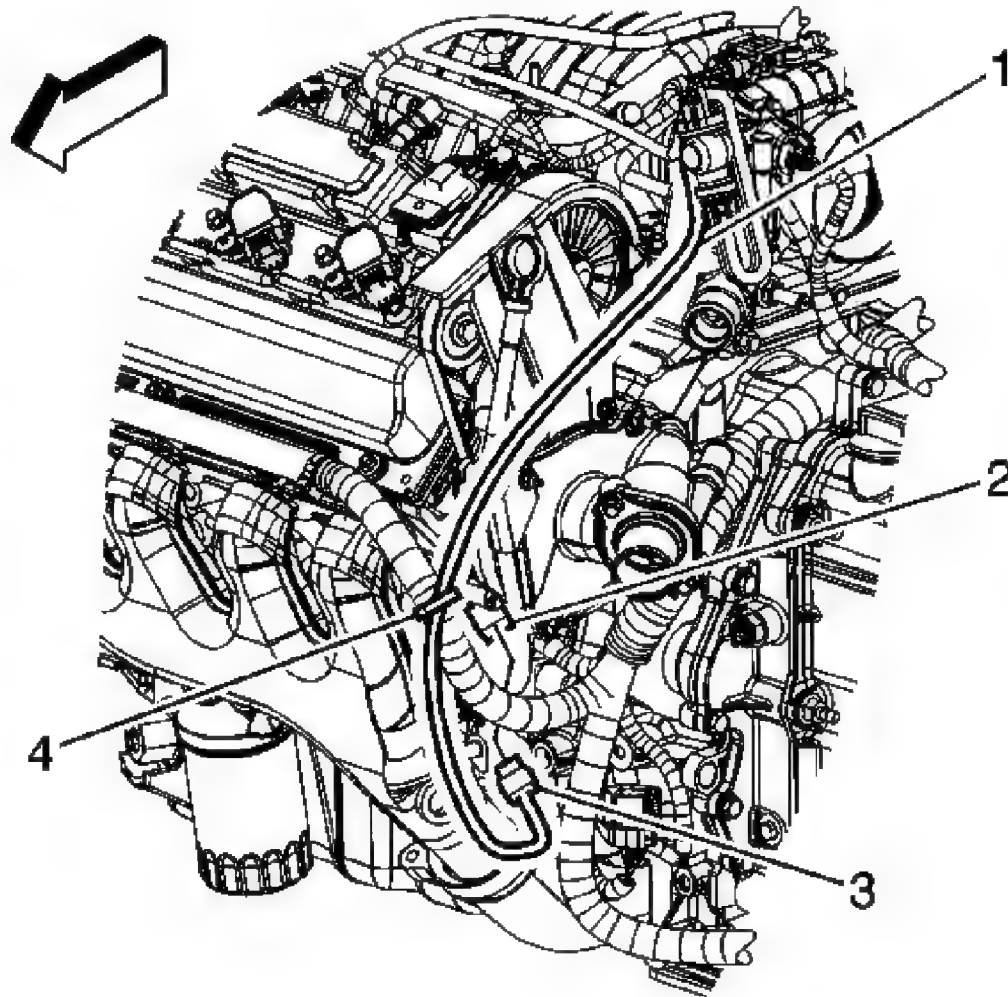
Locating Coolant Heater Cord Electrical Connector
